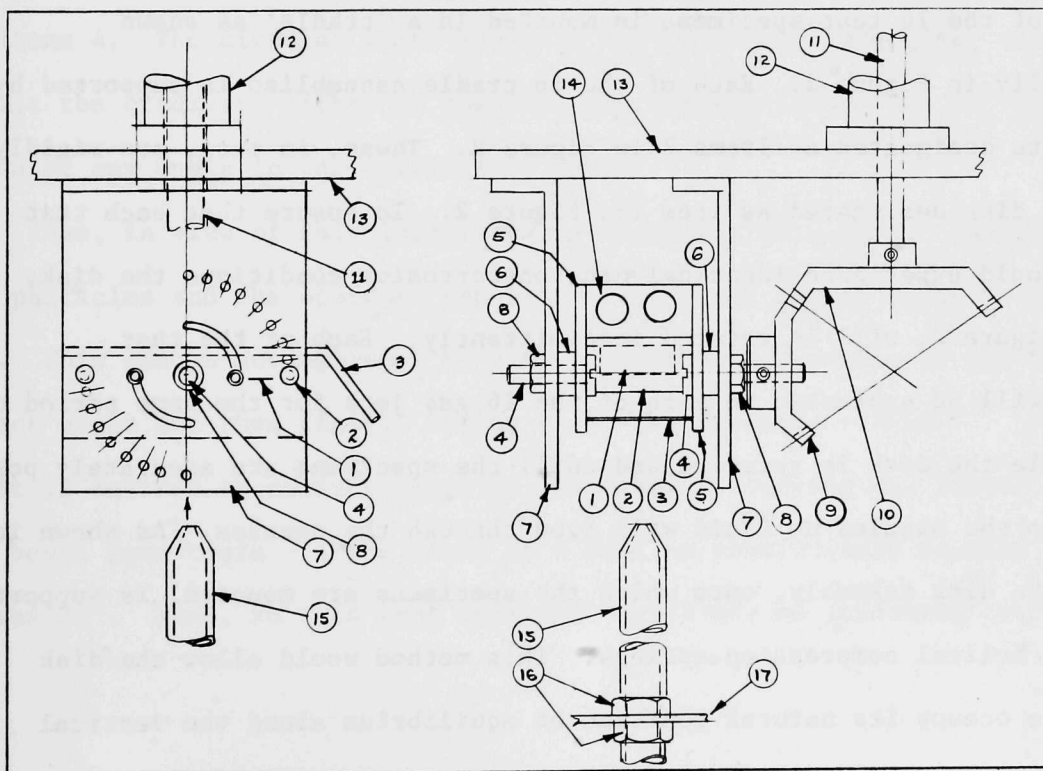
Schematic Illustration of the Cradle Assembly Used for Mounting a Test Specimen.
